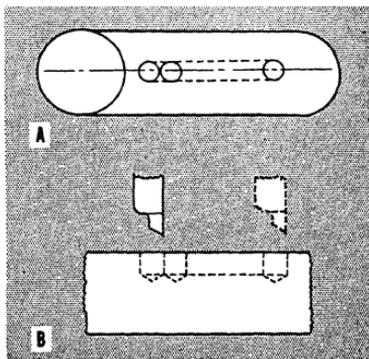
Cutting a keyway in the middle of a shaft.
